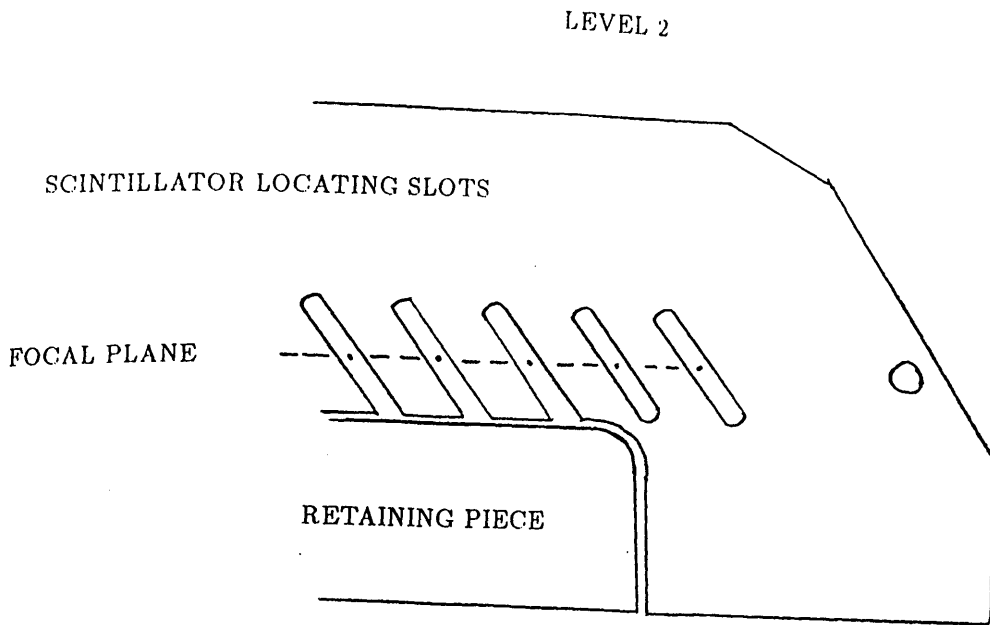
(a) A section of the scintillator locating slots and retaining piece.
